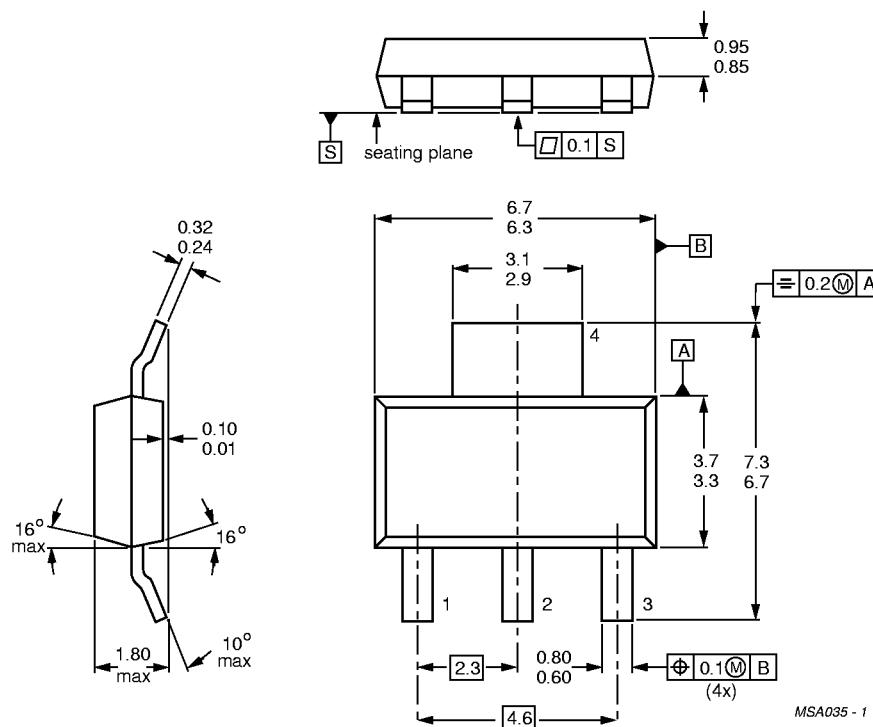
SOT223 surface mounting package<sup>1</sup>.
